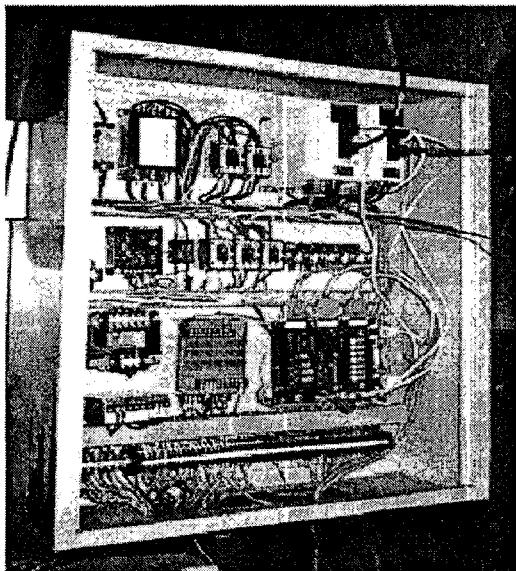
Photograph of the control system for the frame element automatic manufacture system
